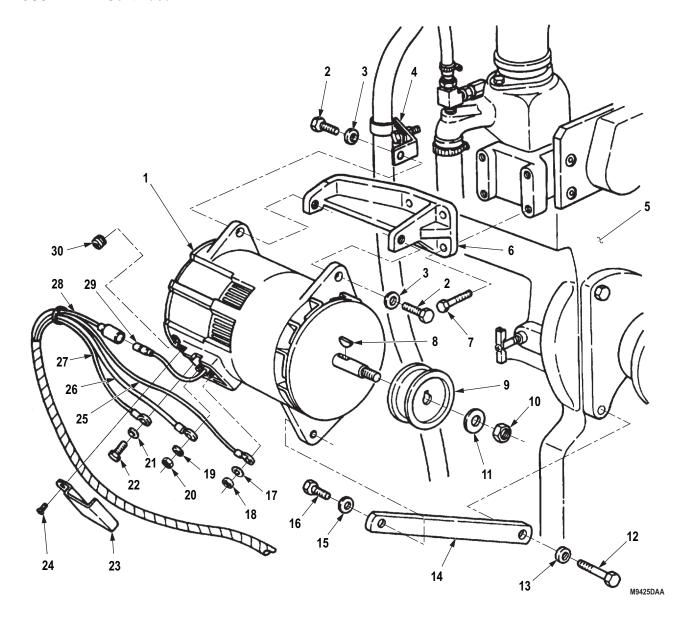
Alternator, Mounting Bracket, and Pulley Adjustment.
